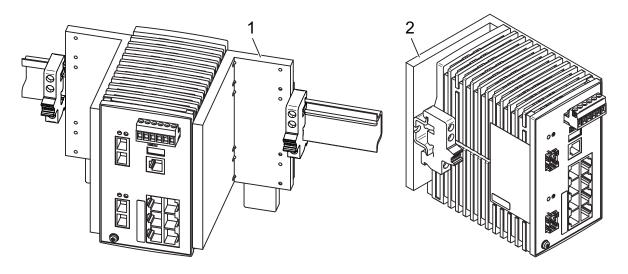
Mounting the RS30-0802... on ships with the Open Rail Mounting Kit 1 - Open Rail Mounting Kit 942 007-001
